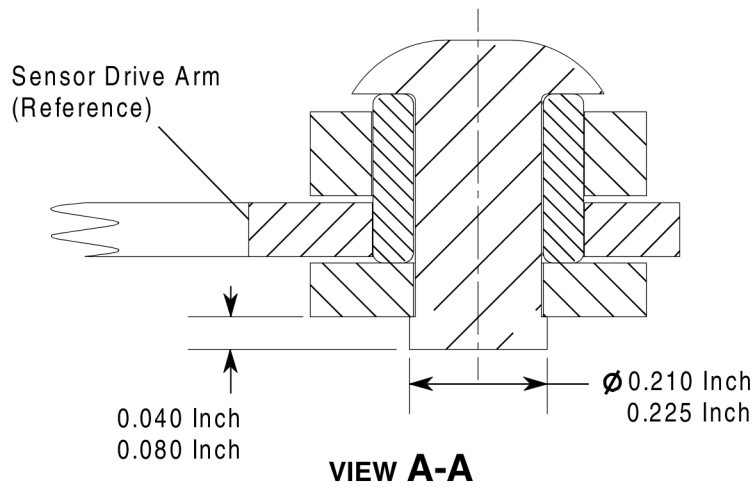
Throttle Quadrant RVDT Linkage Inspection (Sheet 1)
